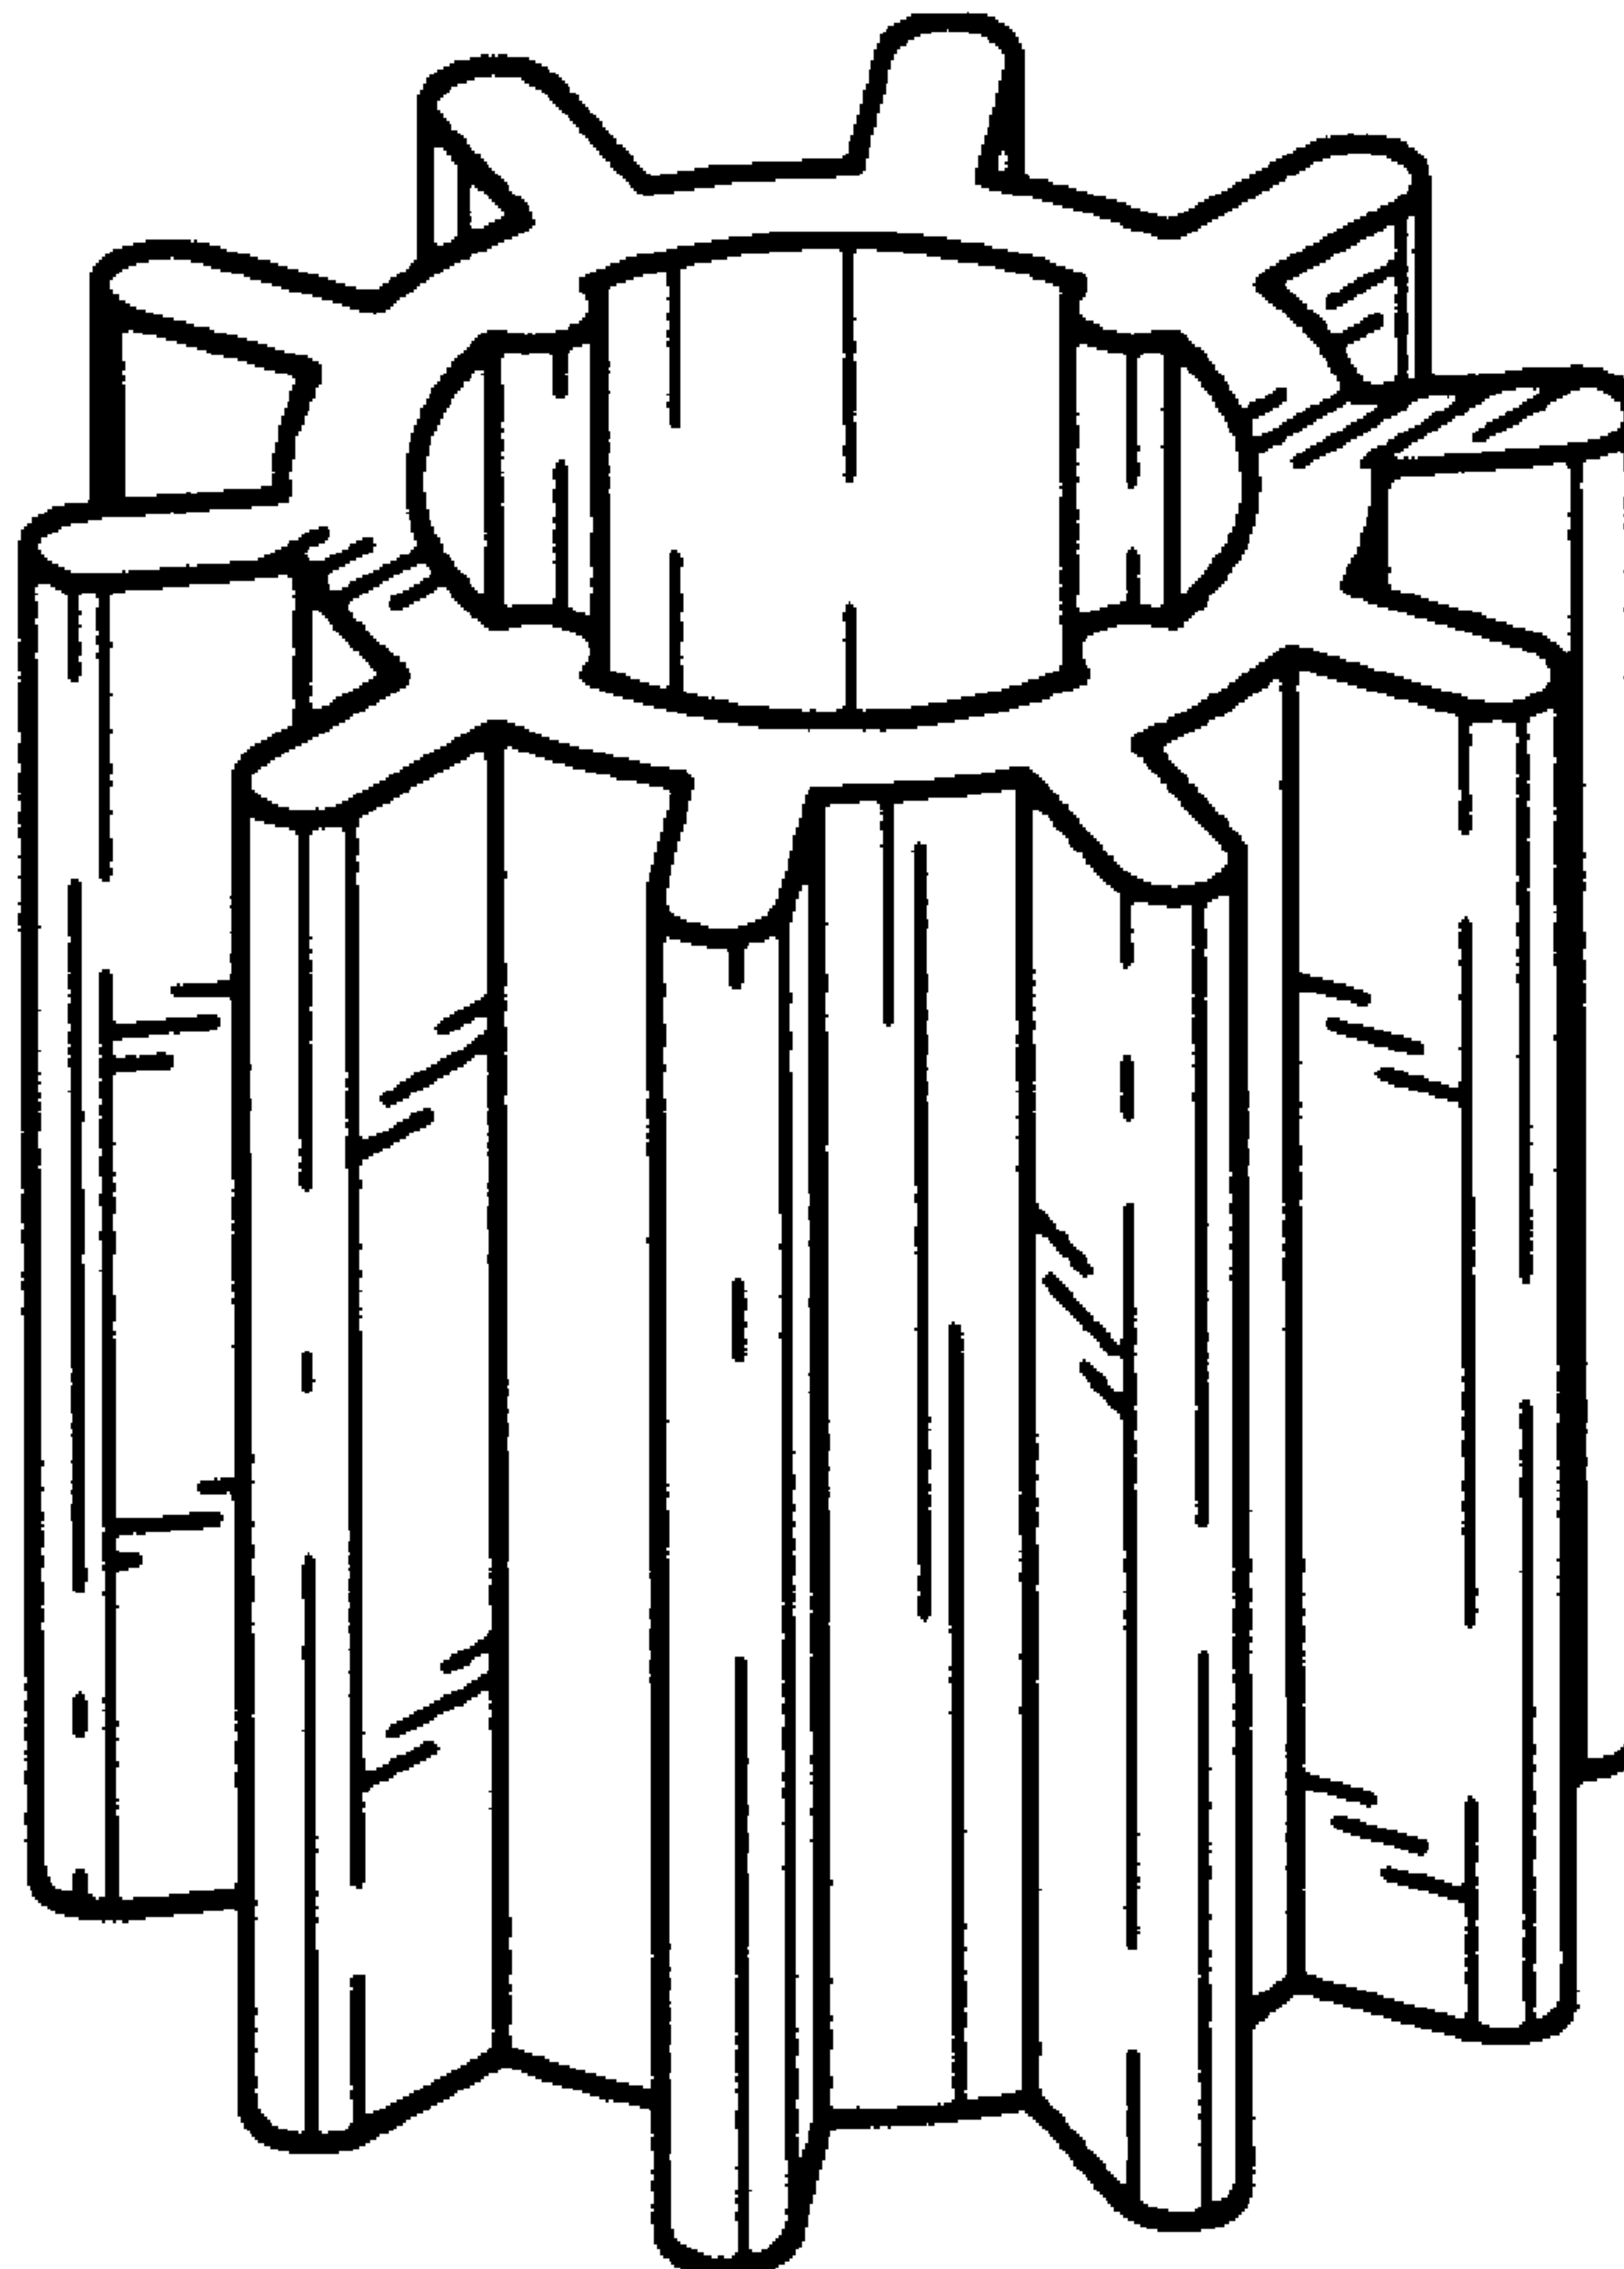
is a perspective view of a ten vane gear shaped crown for a solid-phase reaction support pin showing my new design.
